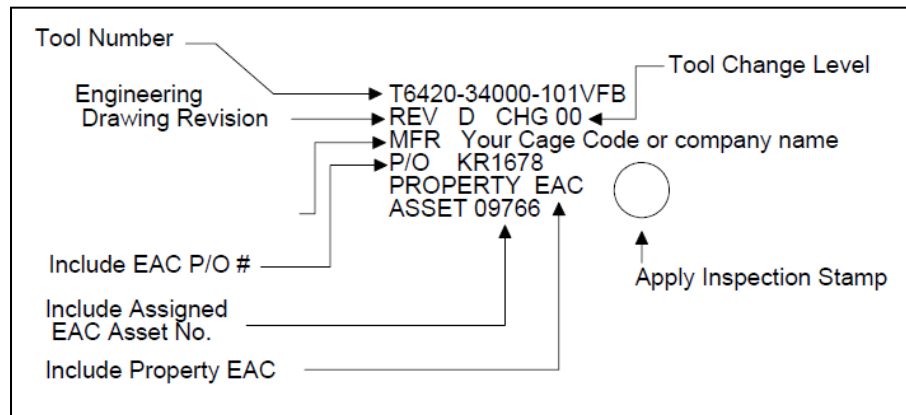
NON-DESIGN TOOL MARKING
